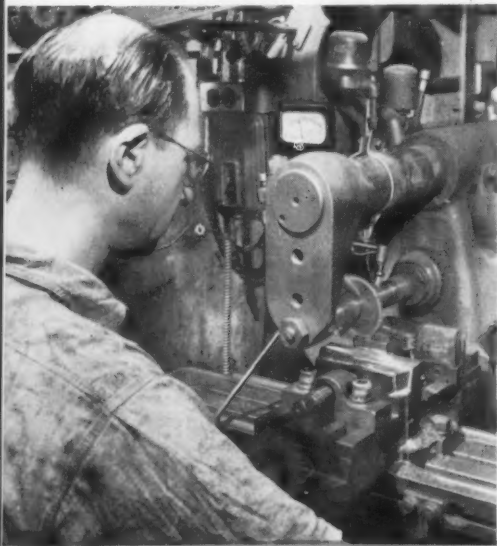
Simple mist system, installed on milling machine, supplies synthetic cutting fluid for maximum tool life and efficiency.
